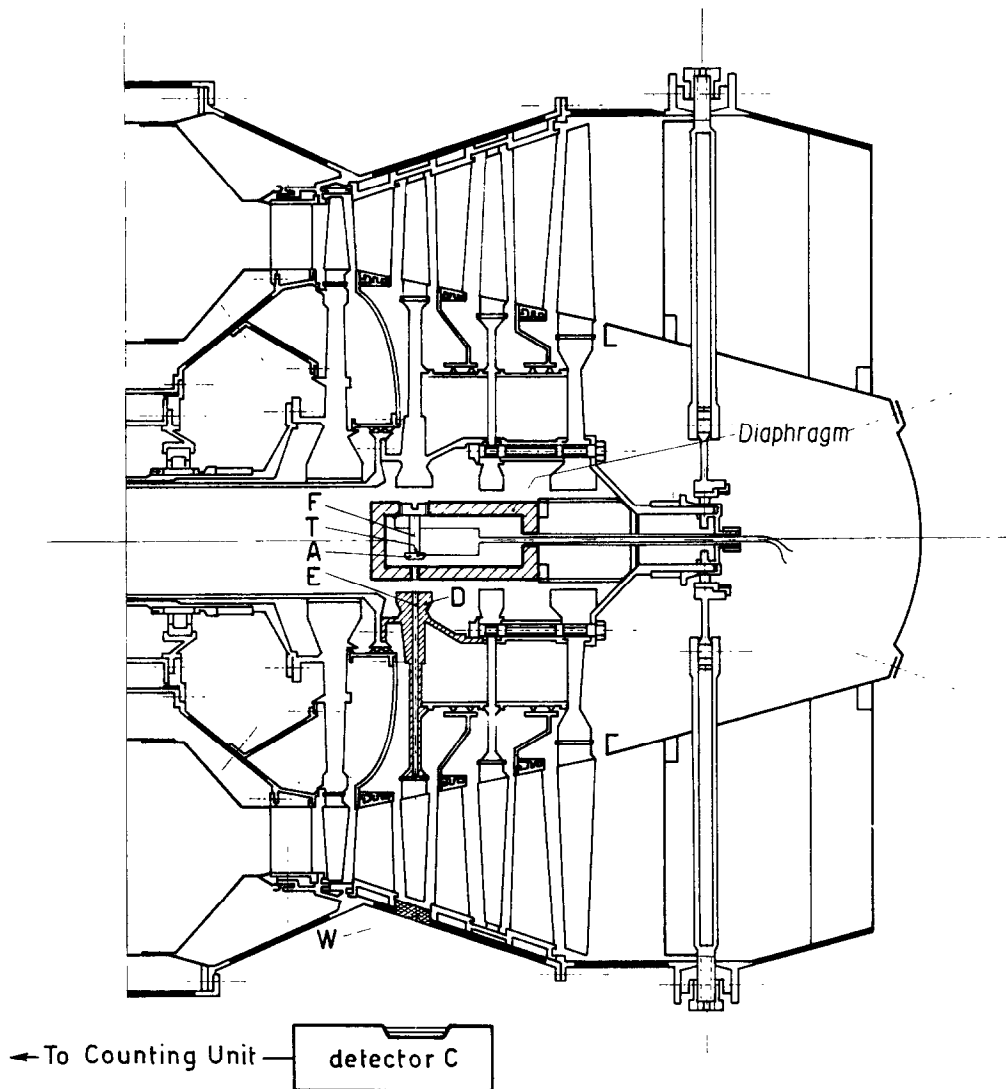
Experimental set-up for thermal field measurement in turbine blading.
